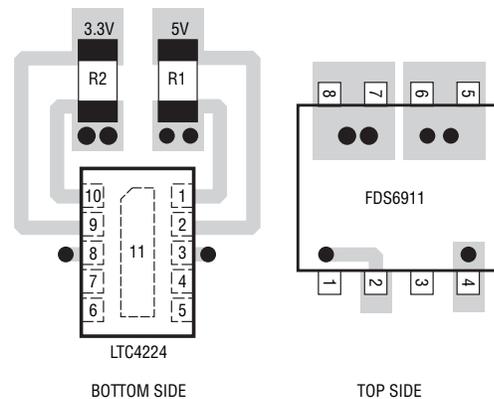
A compact PCB layout of the sense resistors, MOSFET and the LTC4224
